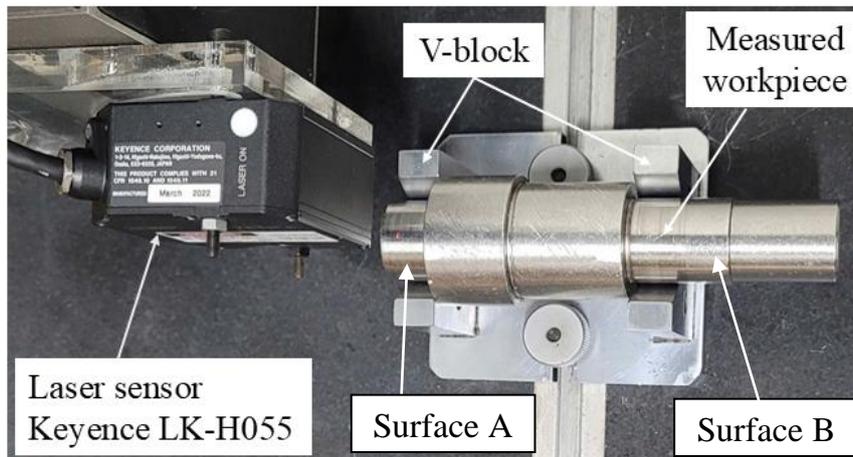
Experimental setup for roundness measurement using a V-block and a laser distance sensor
